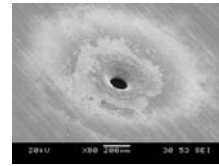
Hole machined by micro EDM using RC circuit in deionized water (workpiece: WC-Co, t100 μ m, machining condition: 80 V, 1000 pF)
